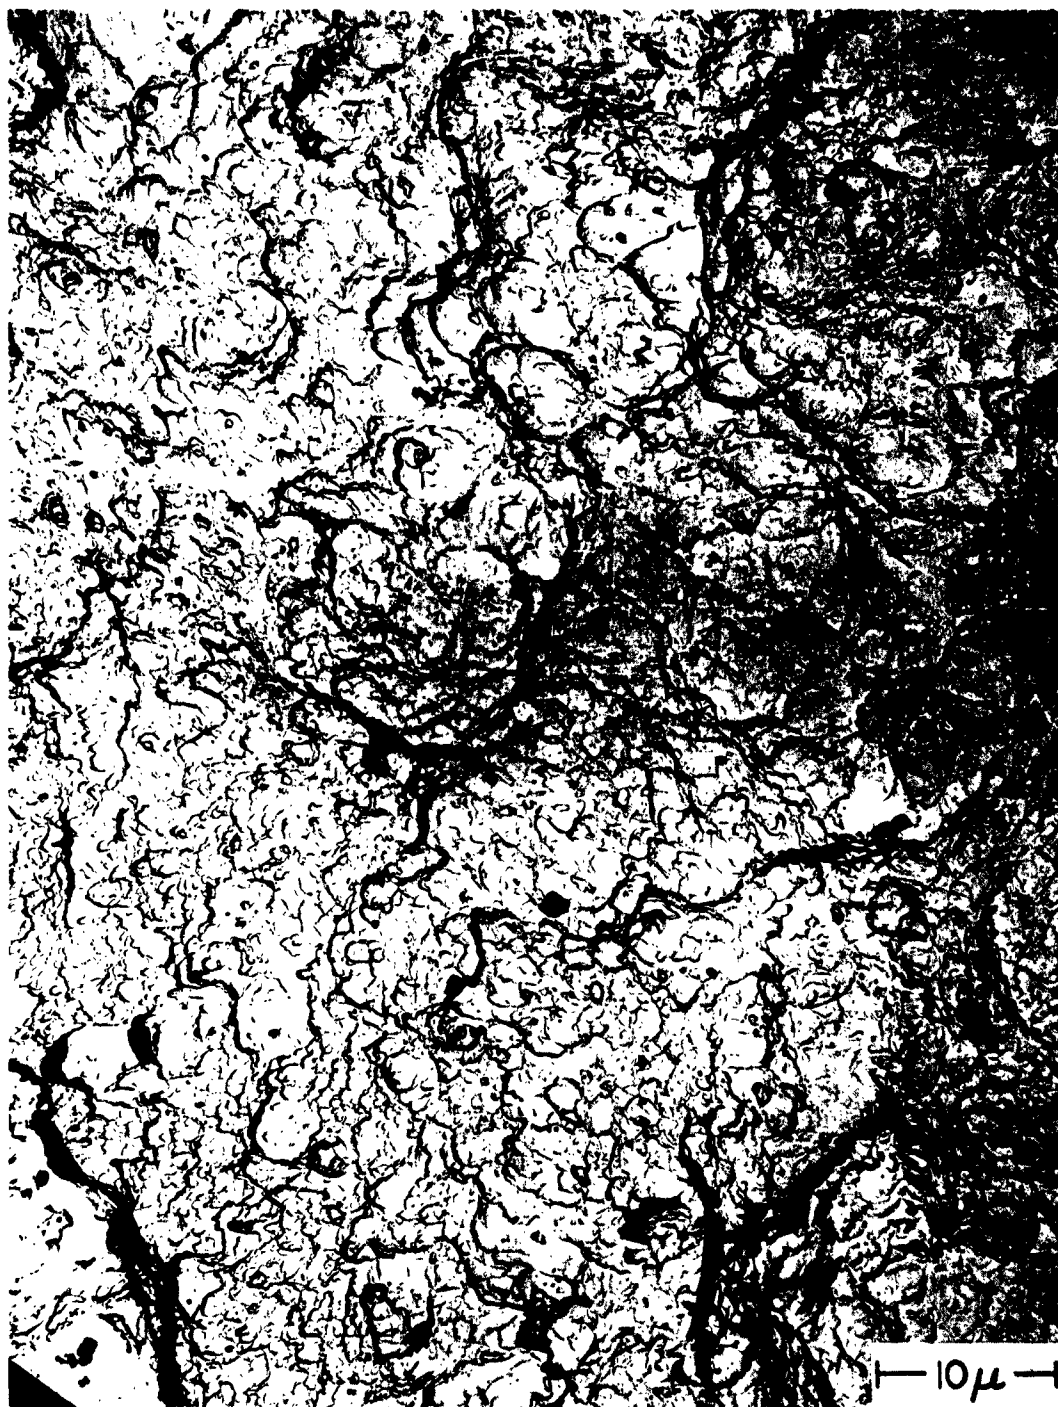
C. Fracture surface of 4338 steel (yield strength  $\approx$  116 KPSI). Dimpled rupture is the predominant fracture mode. 3030X.
